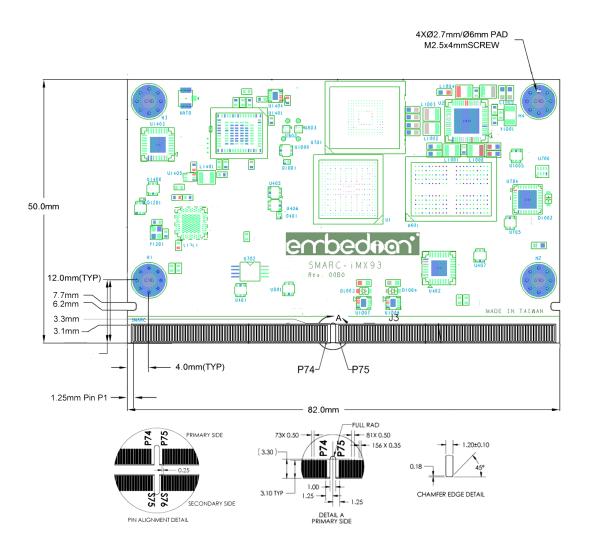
SMARC-iMX93 Mechanical Drawings (Top View)
